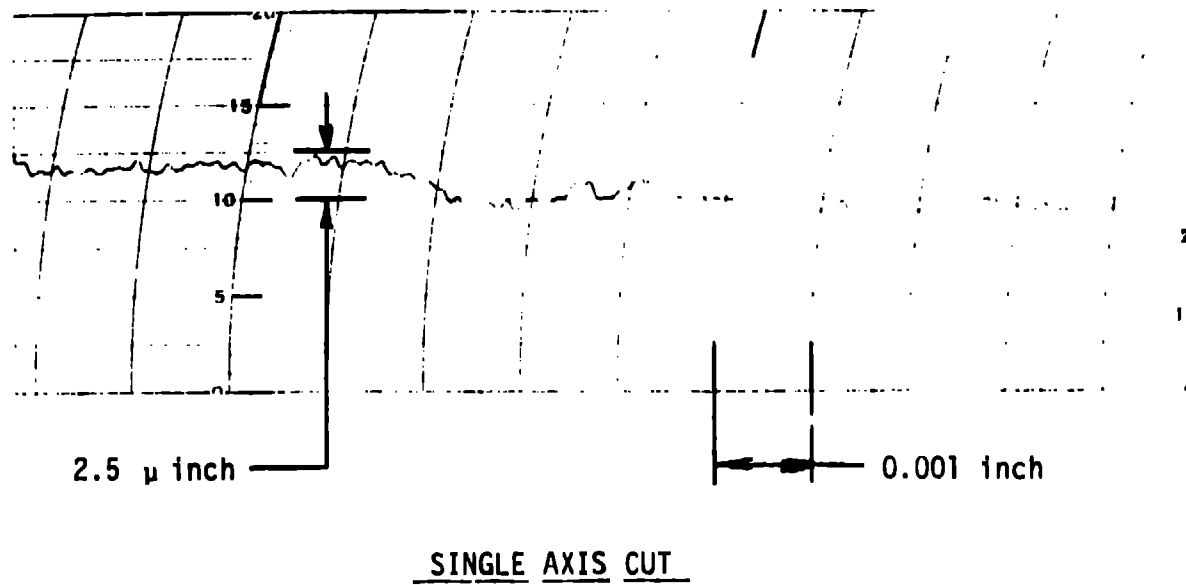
Surface Finish of Part Machined on Moore No. 3
